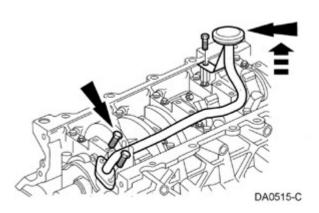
Removing Oil Pump Screen And Pickup Tube Courtesy of FORD MOTOR CO.
